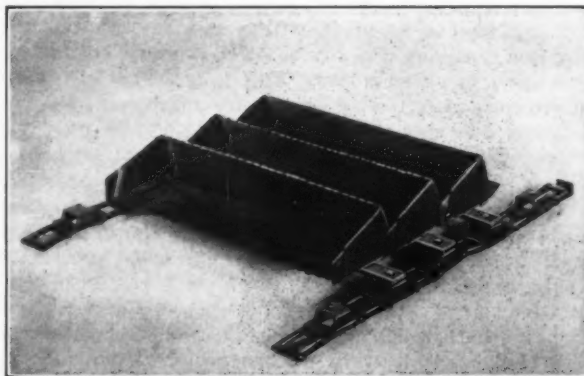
A Section of the Conveyor Used in the Quenching Tank.
